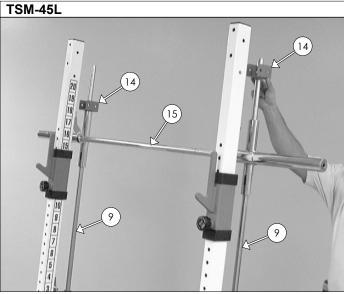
Next, insert the Shaft Retainers (#14), in the position a shown above, to the Linear Shafts (#9).
